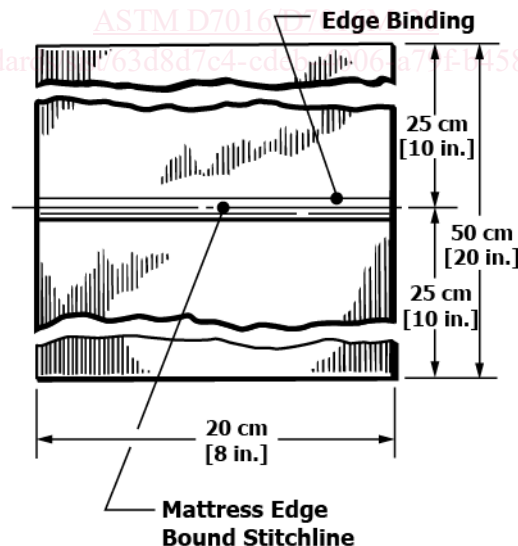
Mattress Edge Bound Specimen—Front Specimen – Front View
